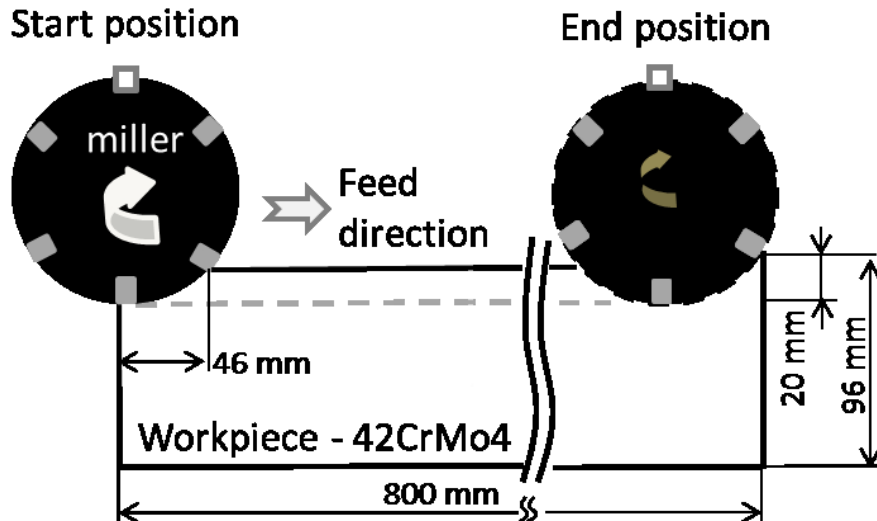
Scheme of one cut segment in the applied milling test setup, as also used in [6].
